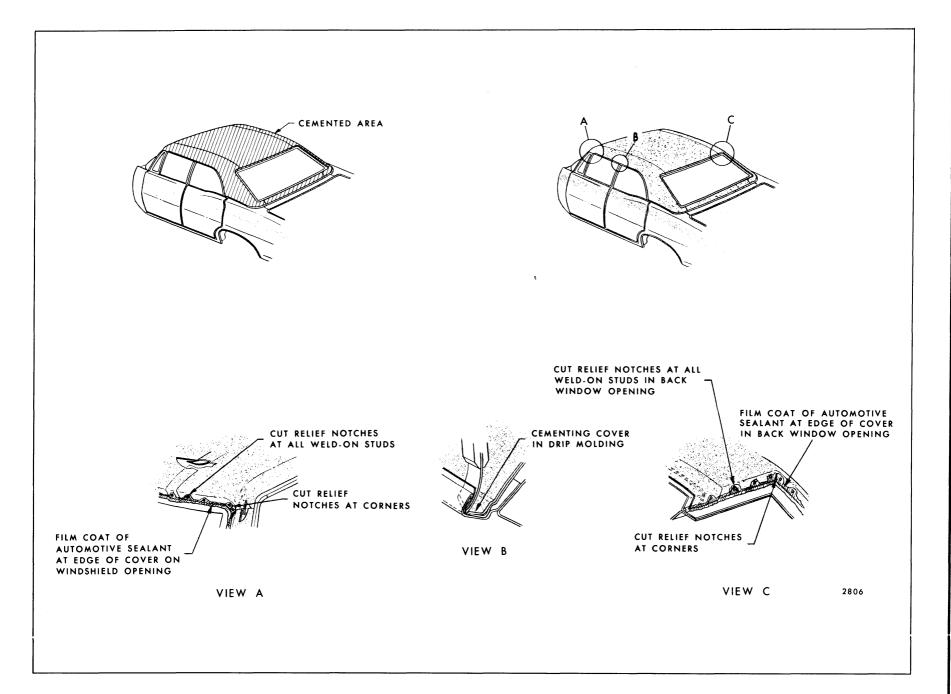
Typical Fabric Roof Cover Installation Without Roof Panel Moldings - "X" Styles
